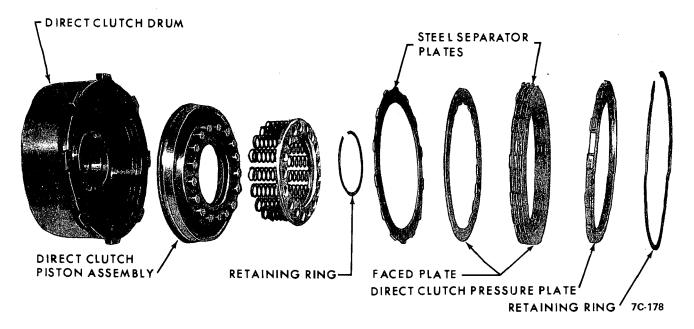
C-111 - Direct Clutch Assembly - Exploded View
